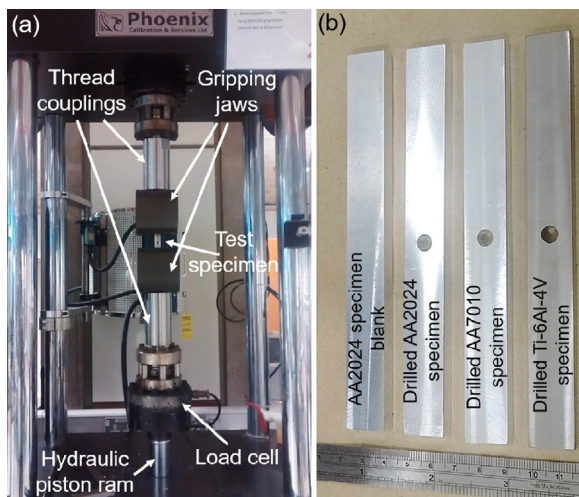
(a) Fatigue test setup and (b) sample test specimens.
